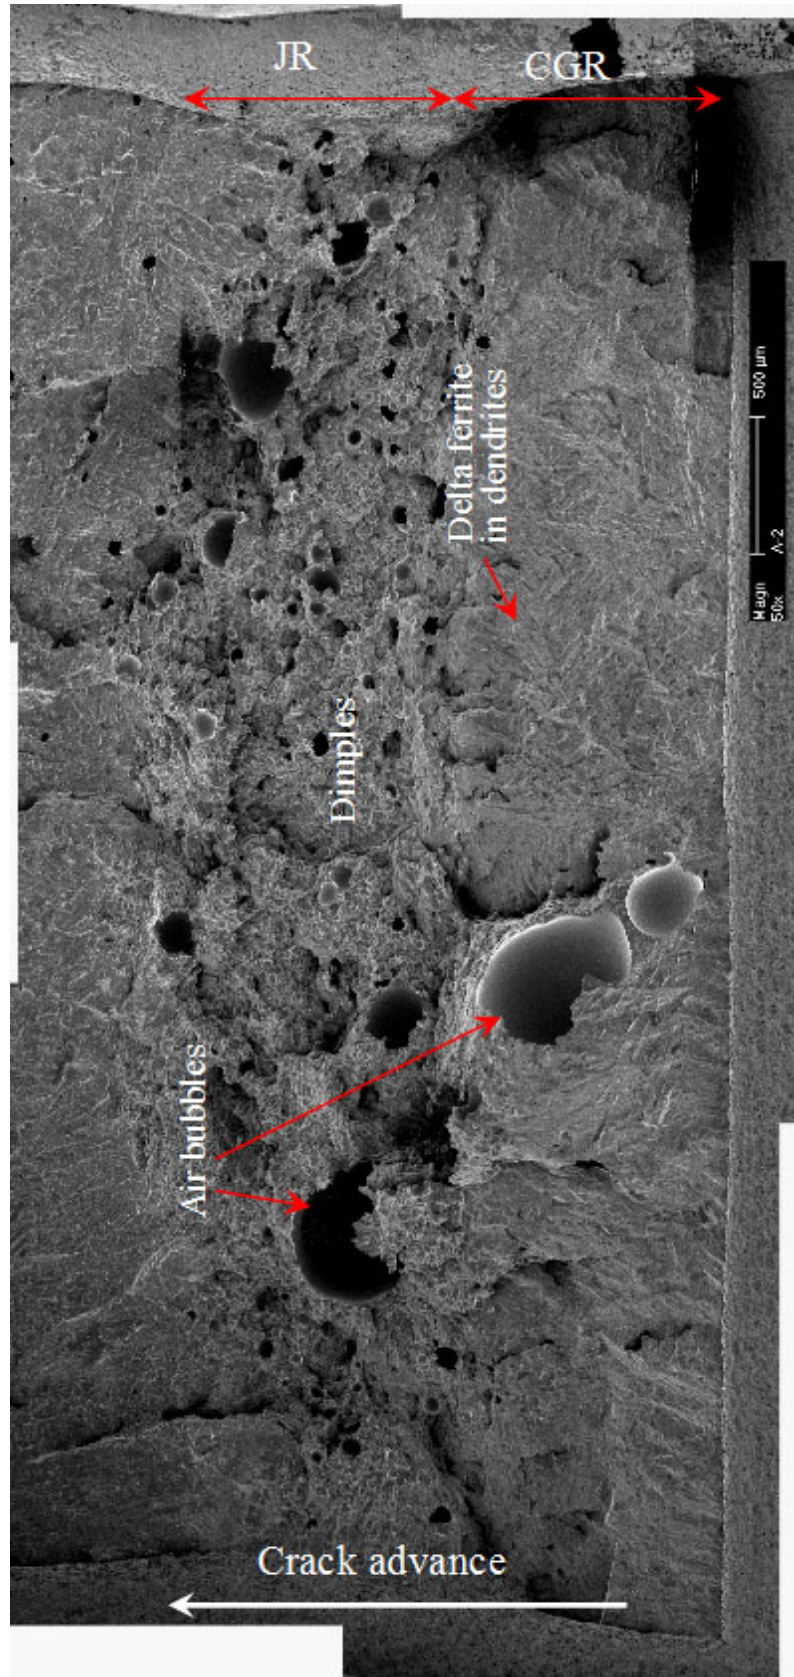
Fracture surface of specimen A-2 tested in low-DO high-purity water.
